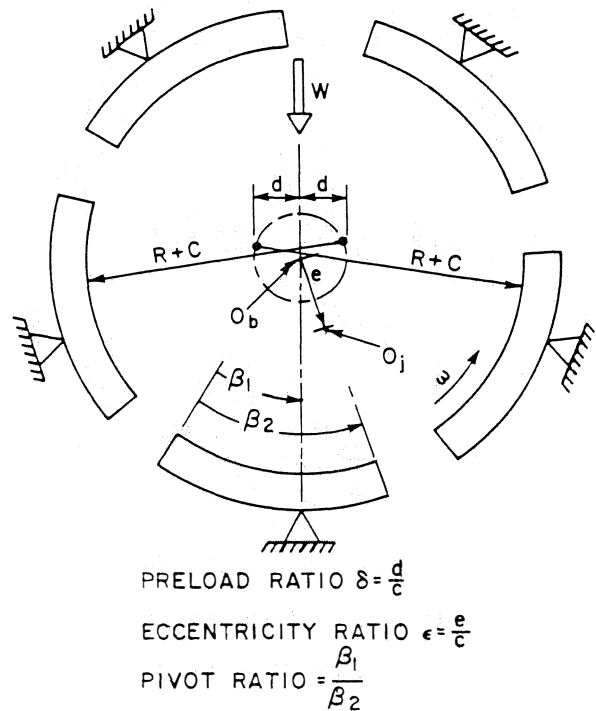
Tilting-Pad Journal Bearing, on Pad Loading.
